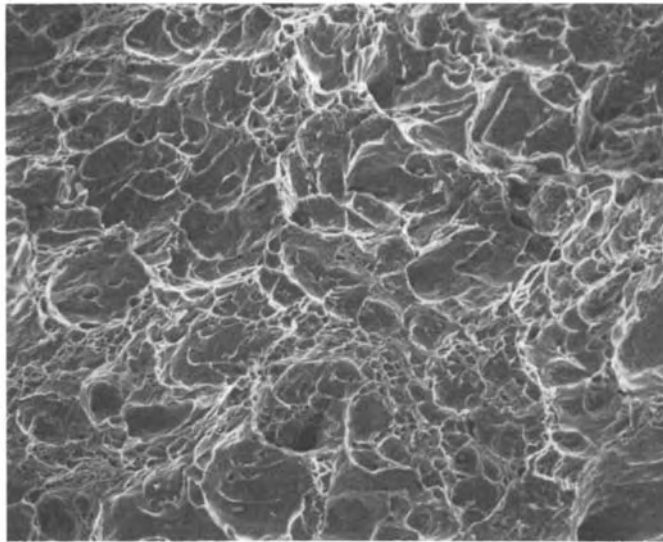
Typical dimpled-rupture fracture surface of a ductile fracture viewed at a magnification of 2000x (shown here at 75%) and at an angle of about 40–50° to the fracture surface
